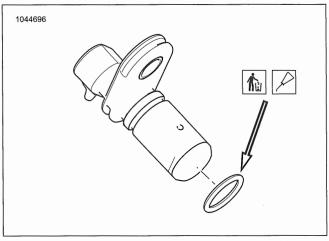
Vehicle Speed Sensor Assembly COMPLETE
